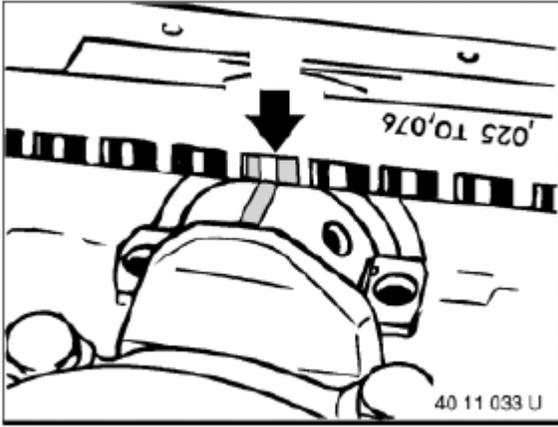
Inspecting Bearing Clearance Using Plastigage
